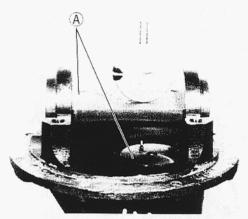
(A) Special tool (Bevel pinion mounting dummy 09926-78310)
